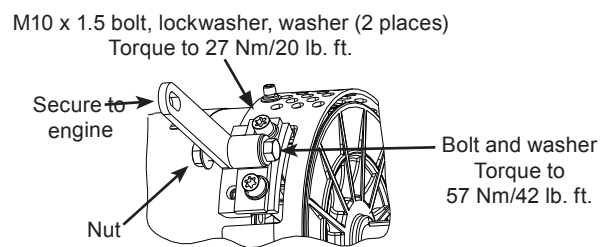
Vibration Dampening Bracket Installation (Example only; install if required)
